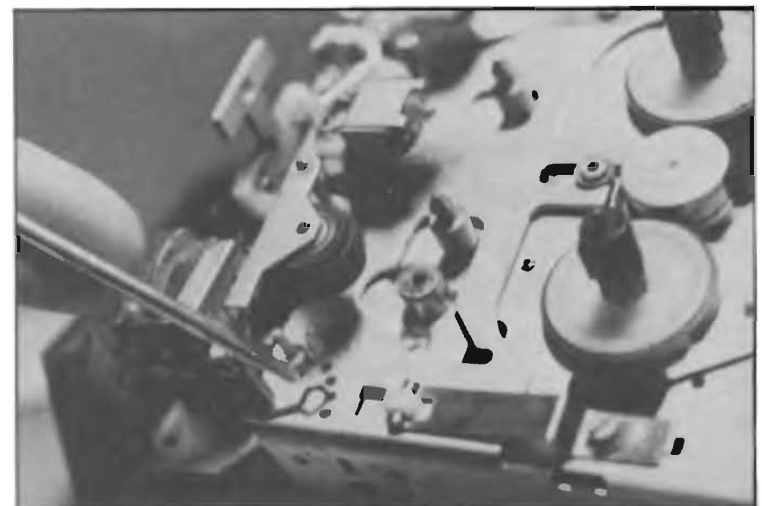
Pinch roller adjustment is indicated by the screwdriver. The flywheel and capstan spindle have been removed.
